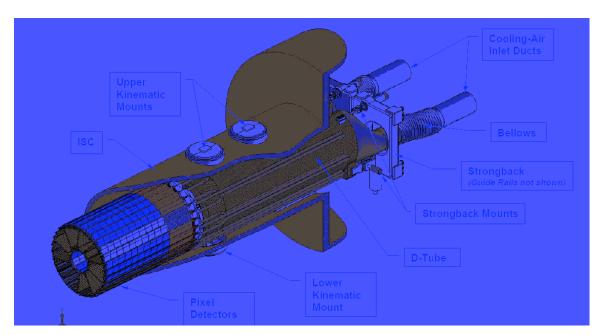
Detector assembly in the installed position supported with three kinematic mounts
